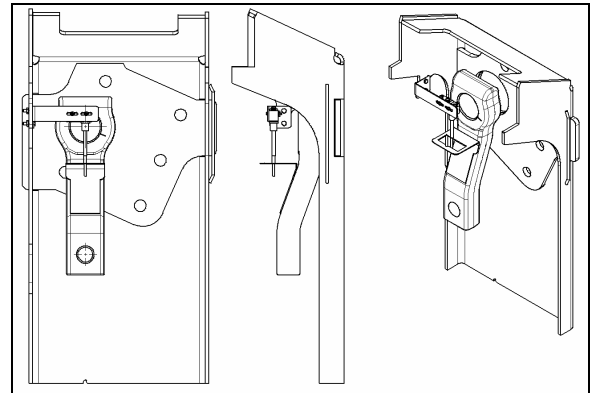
TAG AXLE UNLOADING SWITCH ADJUSTMENT
